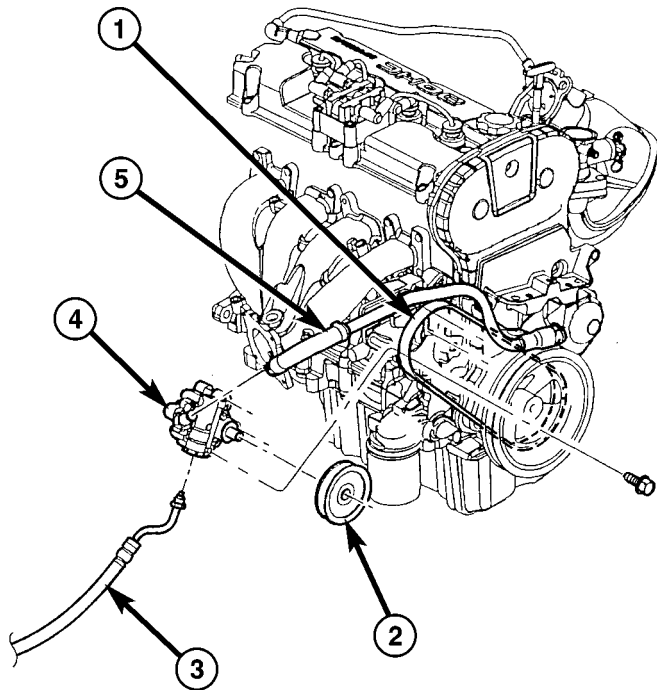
Pump Mounting To Engine (2.0L/2.4L)
